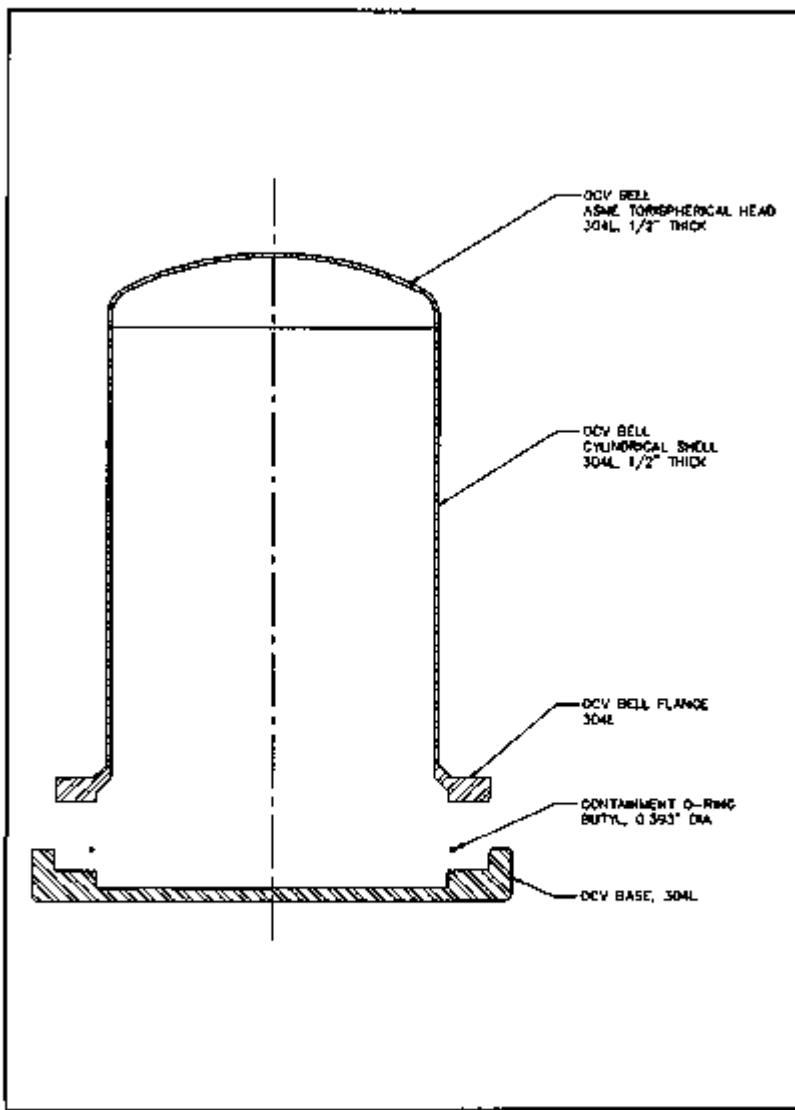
Exploded View of DCV Containment Boundary Components.
